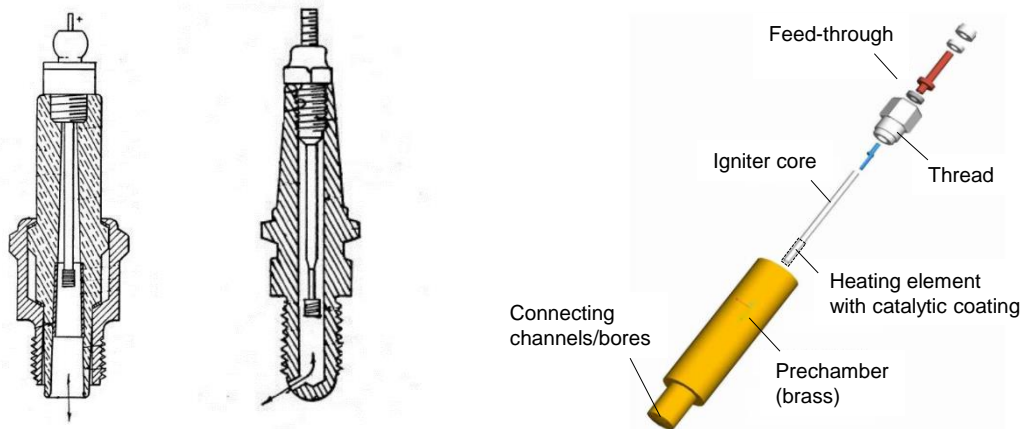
Cut view of early designs of the CPT igniter as shielded and prechamber version (left) [132] and explosion view of the improved prechamber design (right) [40].
